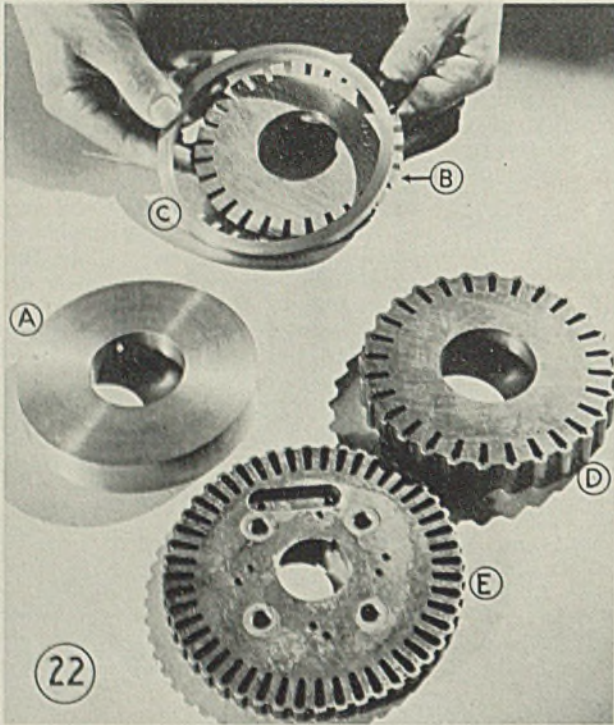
Milling and brazing technique cuts die costs to only 1/3 to 1/15 of former costs
